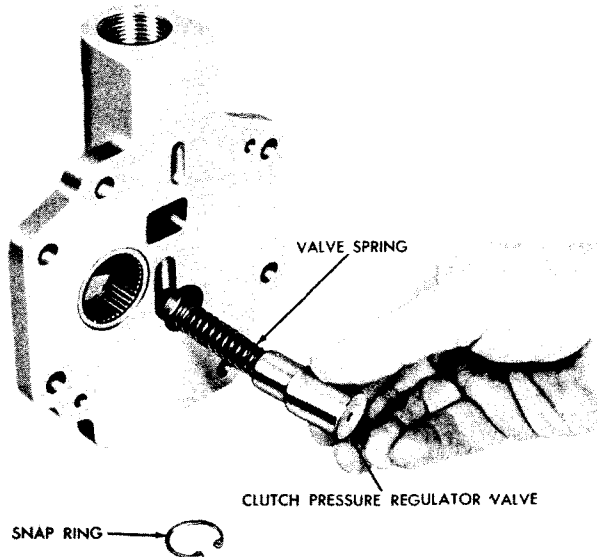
Removing (or installing) clutch pressure regulator valve
